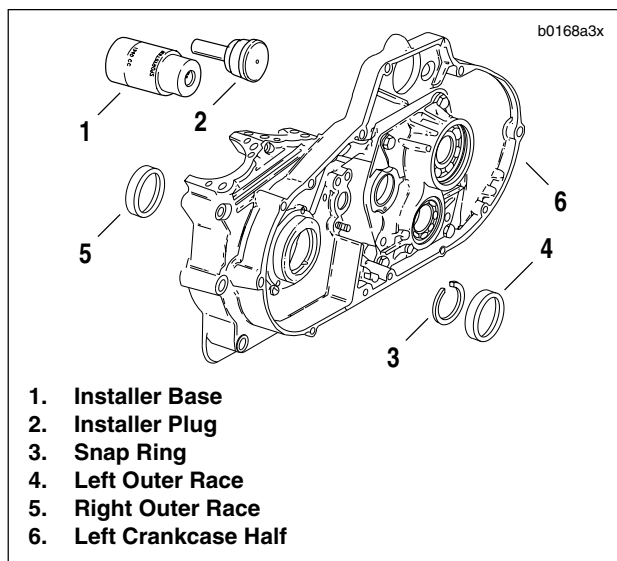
Installing Sprocket Shaft Bear Outer Races
